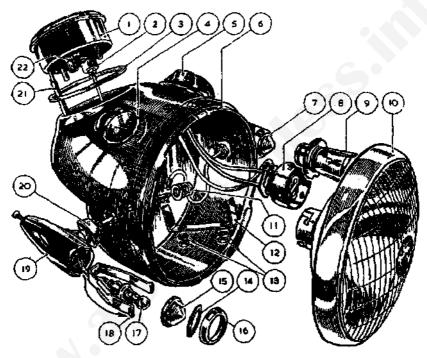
HEADLAMP AND SPEEDOMETER ASSEMBLY—1955-58 MODELS.
